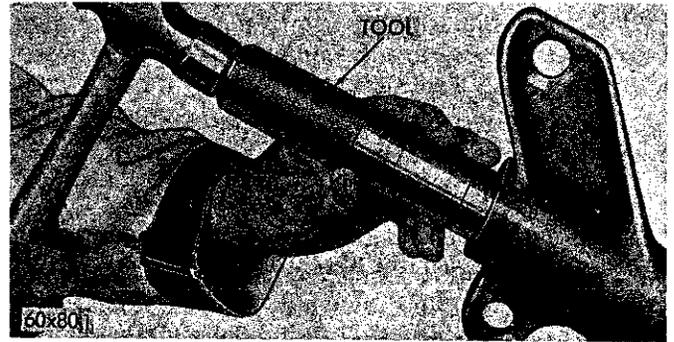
Installing the Gear Shaft Housing Outer Bearing
